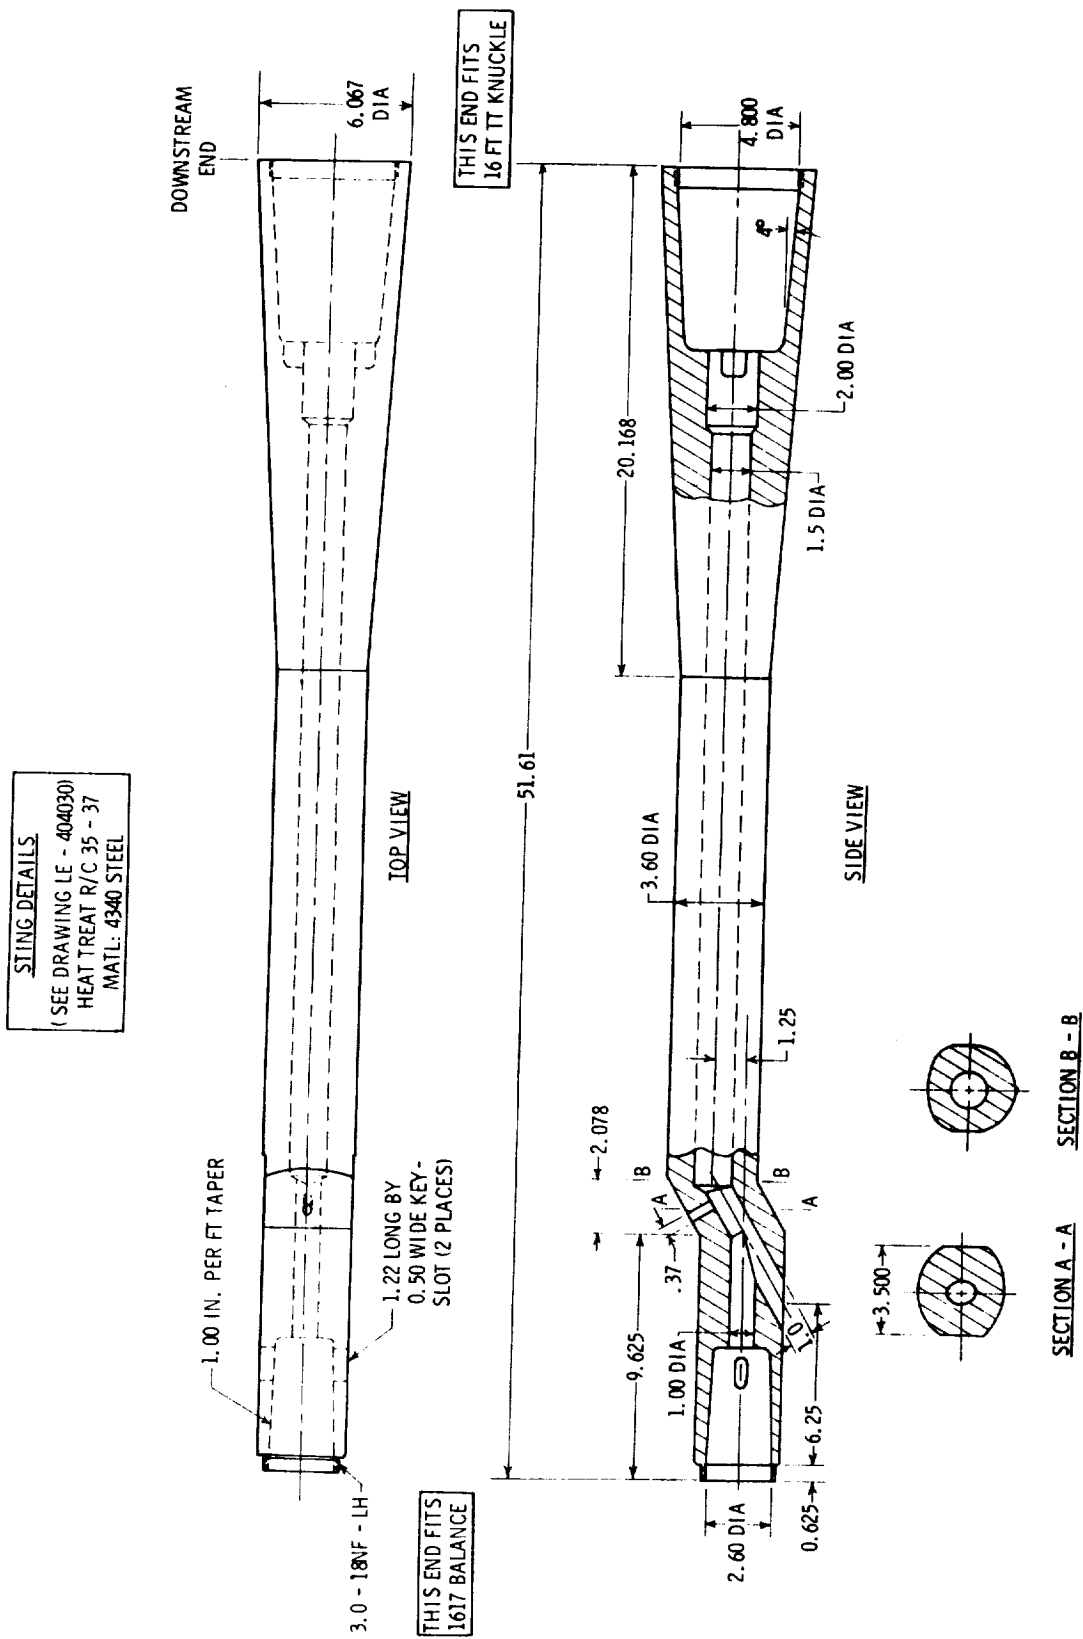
Sketch of sting LE-404030. (All dimensions are in inches unless otherwise indicated.)
